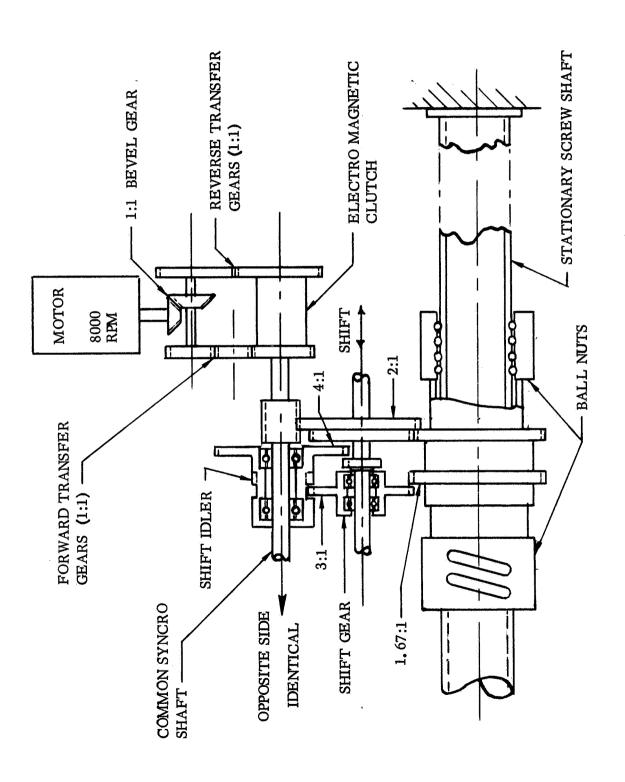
Schematic Arrangement - Counterweight Axial Drive
